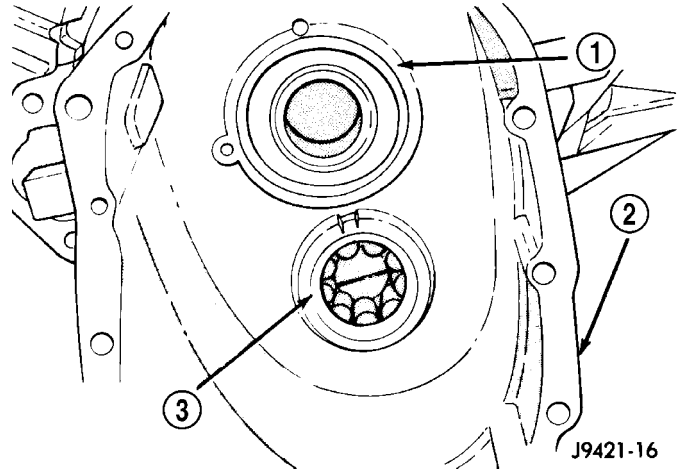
INPUT AND COUNTERSHAFT BEARING RACE
